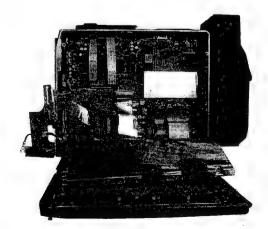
(4) Diagnosis of the 50P CONN. board
